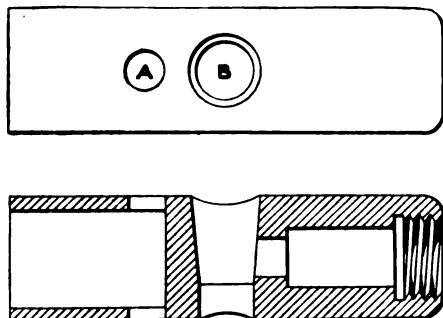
PERCUSSION PELLET FOR GRAZE FUSE
